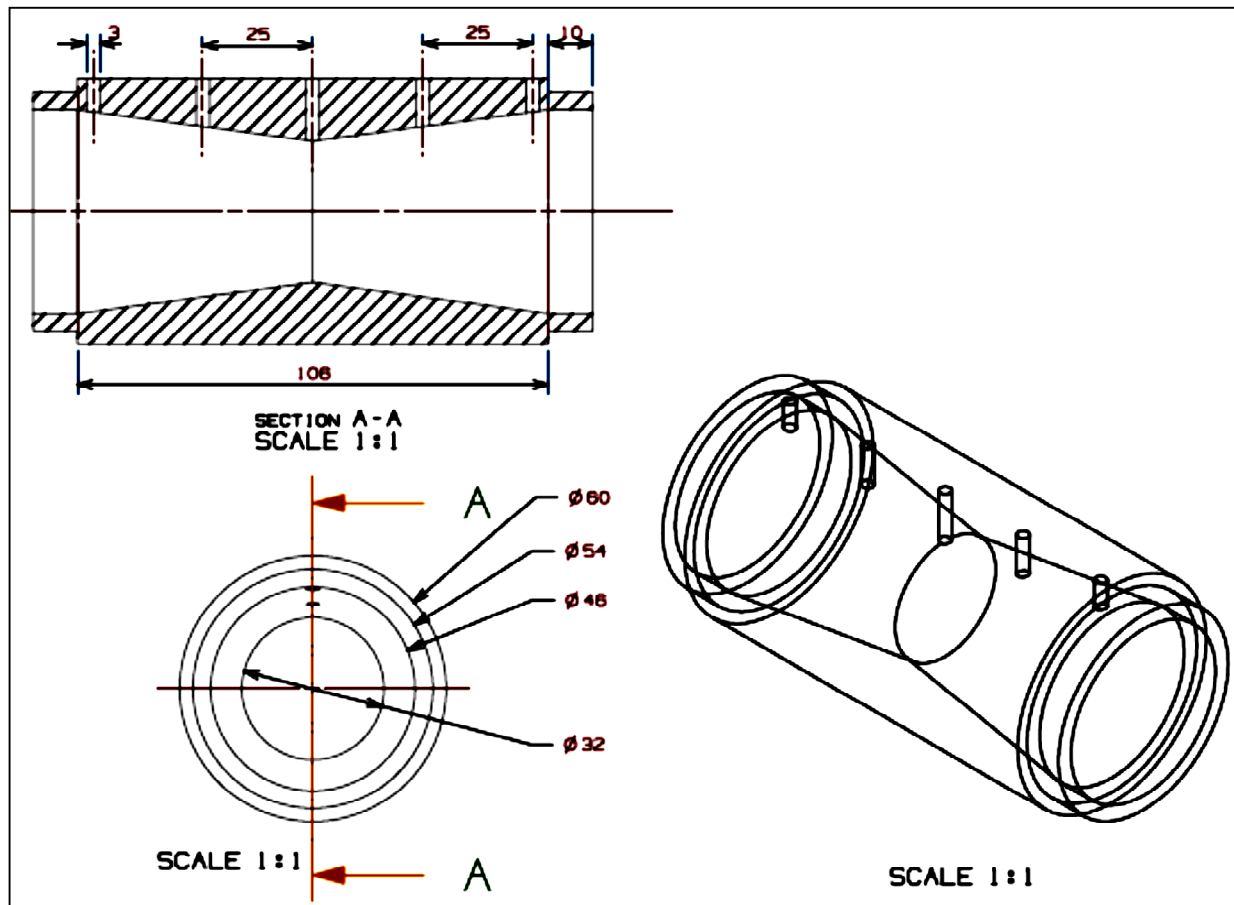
Drawing of C-D tube $\beta=0.7$; $\theta=15^\circ$
